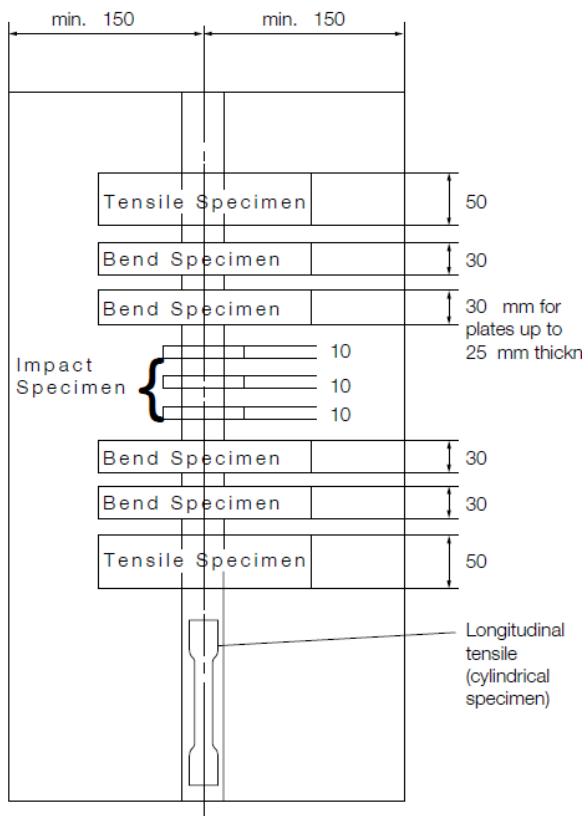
BUTT WELD TEST ASSEMBLIES (TWO-RUN TECHNIQUE)
